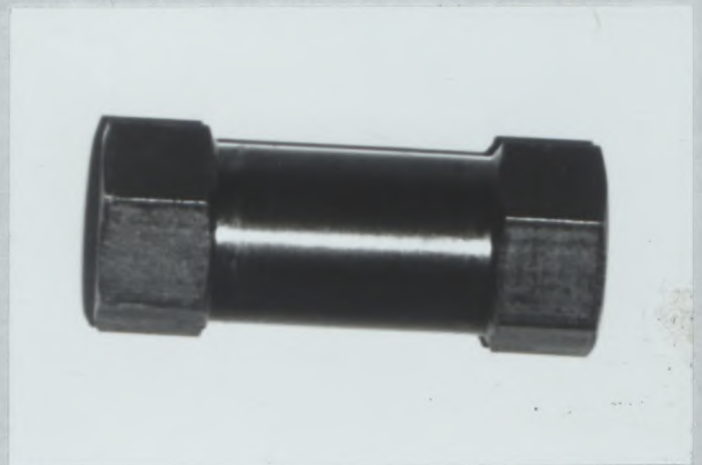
REINFORCED STEERING ARM TYPE A
